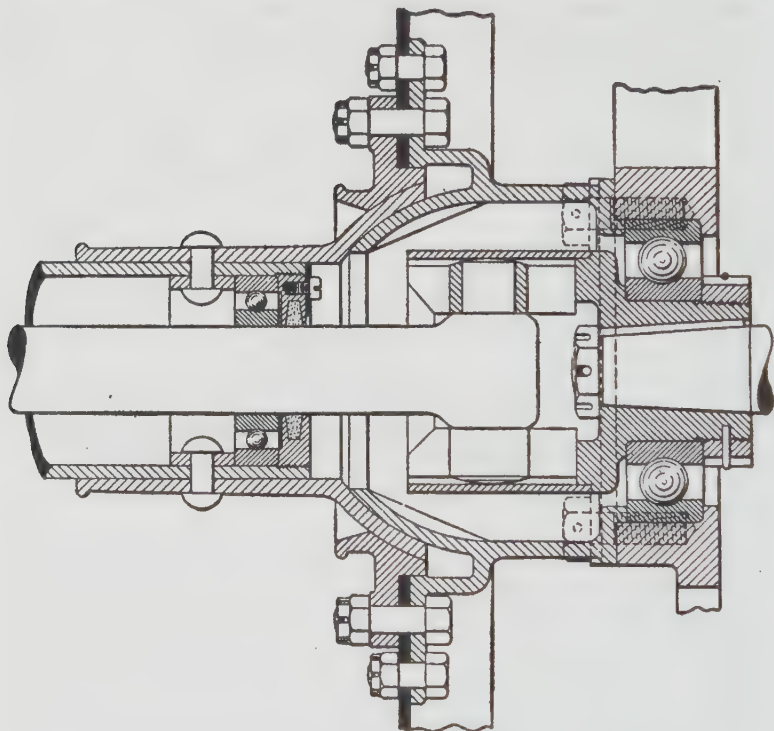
SPHERICAL SUPPORT OF TORQUE TUBE.
